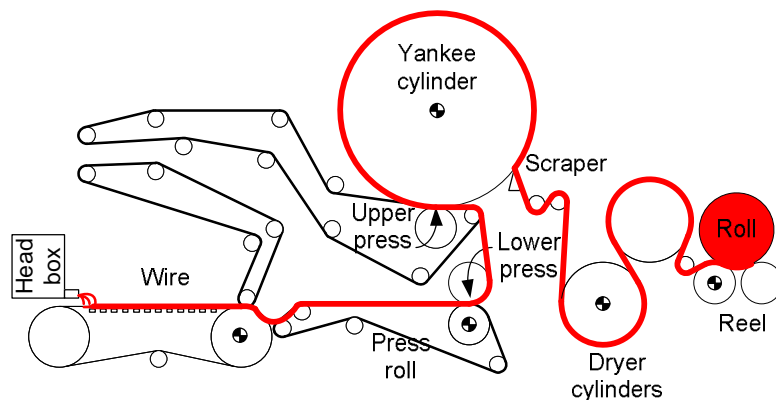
Disposition of main parts of paper machine in factory „Komuna” Skoplje
